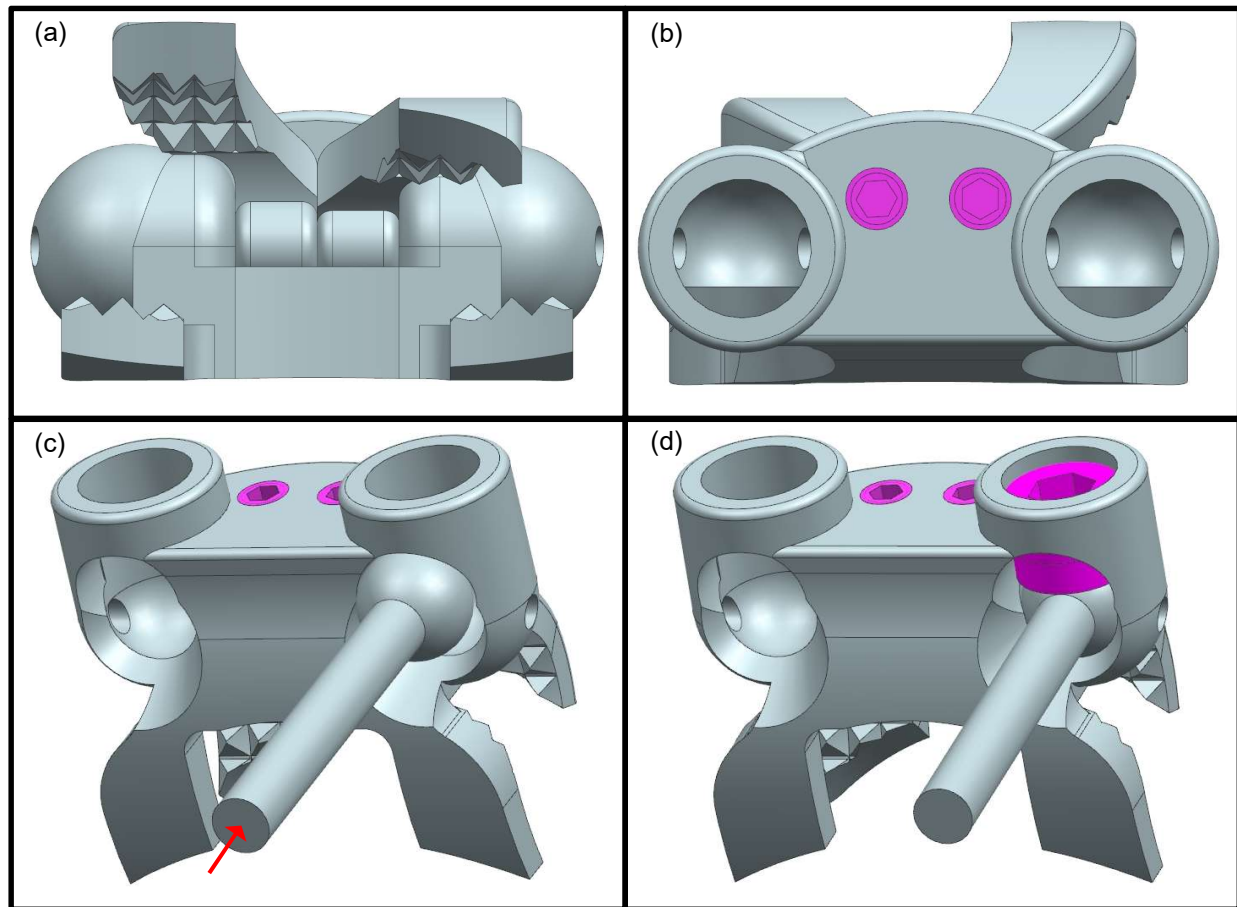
a) Front view of clamp implant showing independent superior jaws, b) rear view of clamp implant showing the addition of a second locking screw, c) bottom view showing insertion of polyaxial rod and d) bottom view showing final position of polyaxial rod locked in place by M8 cap screw
